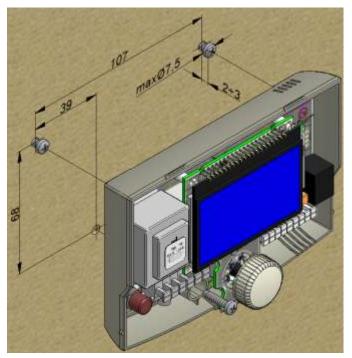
Installing the regulator on a wall (reference drawing)
